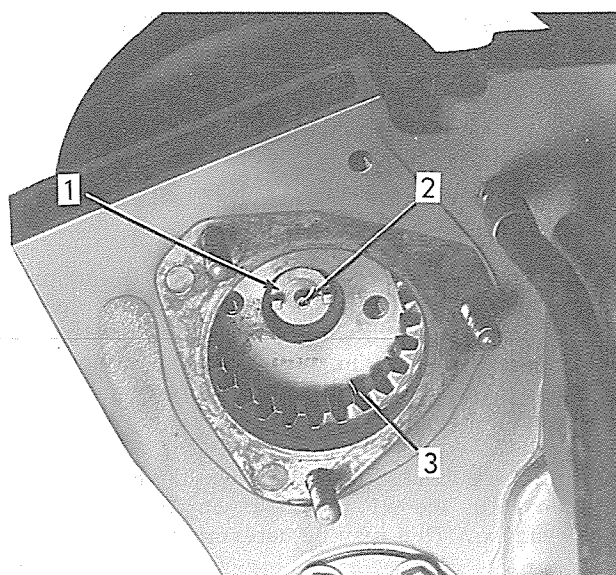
Pump Timing Shaft and Spring Installed (Used Only on Engines With Fan Drive Pulley) (T-29507)
